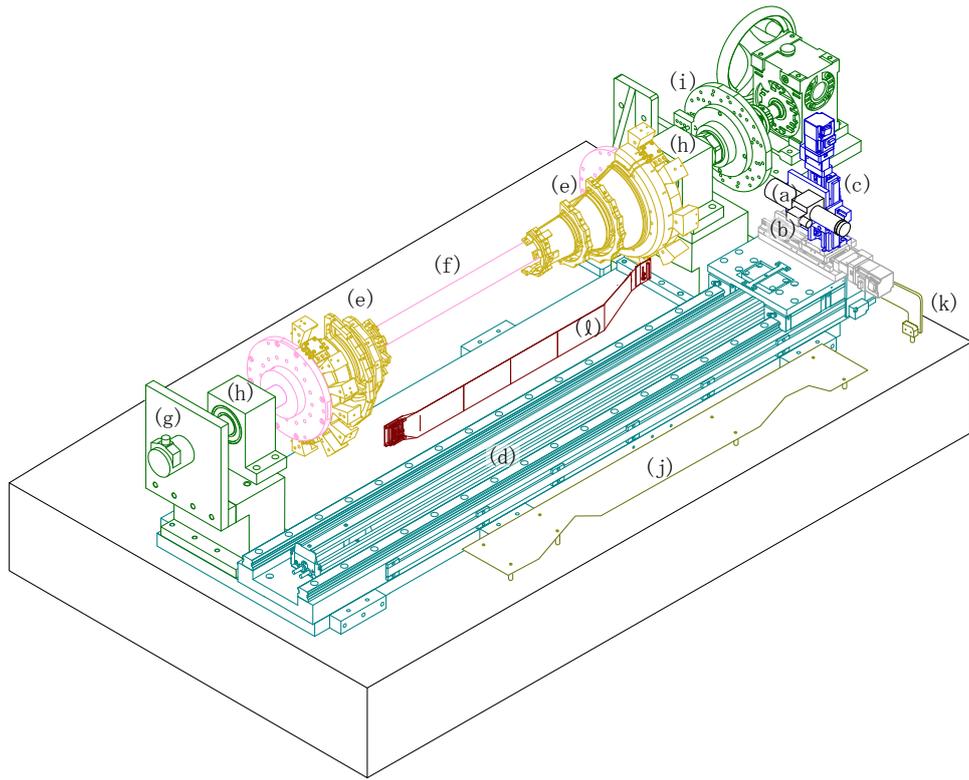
The 3D coordinate measurement machine system on the ladder mount table. The ladder mount arm is not shown here. (a) The CCD camera with working length of 55 mm, (b) (c) (d) X, Y, Z linear rails with position encoder, (e) End-rings, (f) Support rod, (g) Angle encoder, (h) Bearings, (i) Index plate and the worm gear for the rotation of (f), (j) (k) Limiter plate and switch for crash prevention, and, (l) A ladder.
